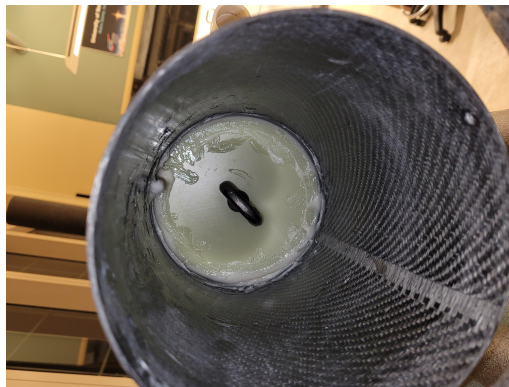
Constructed and Installed Fixed Bulkhead Assembly
